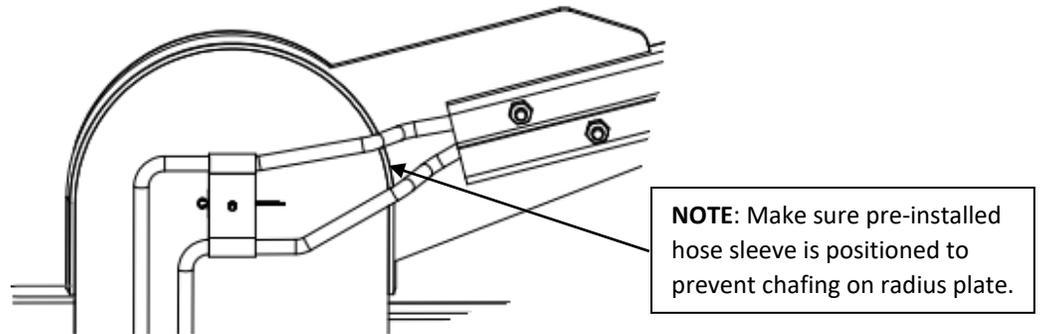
Routing Arm Cylinder Hosing Through Swivel Clamp
